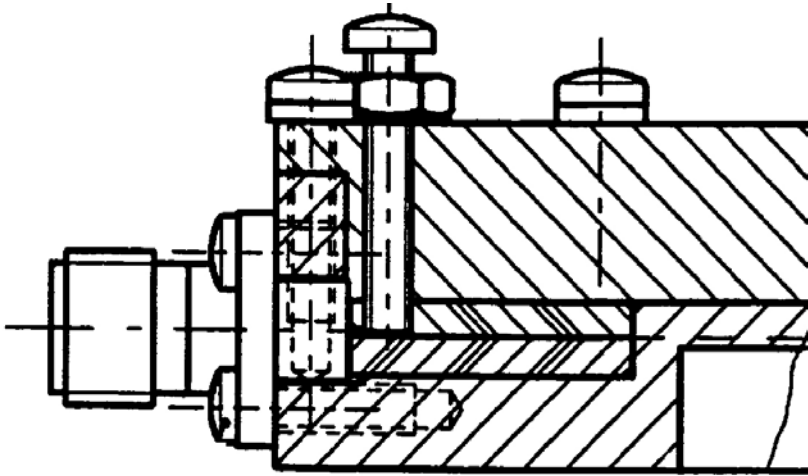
A tuning screw was mounted next to the coaxial input for the fourth hybrid arm to further improve isolation by adjusting the port impedance [8].
